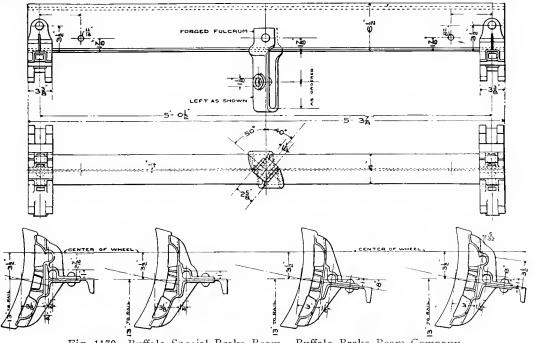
Buffalo Special Brake Beam. Buffalo Brake Beam Company.
